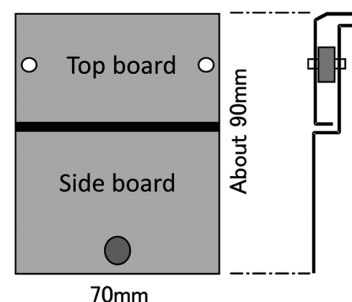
Test piece simulating engaged joint of air conditioner outdoor unit
